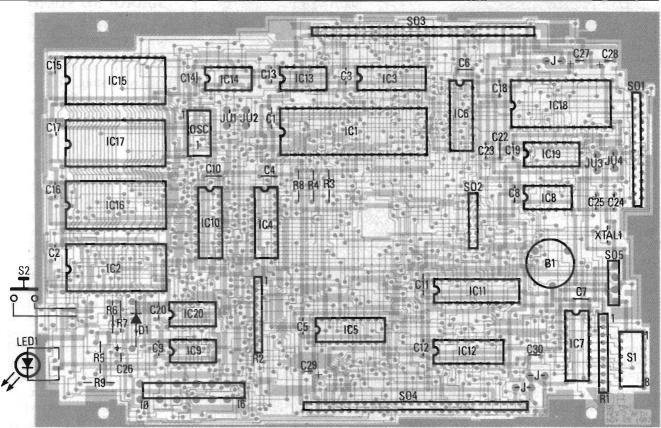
ALL OF THE COMPONENTS mount on one double-sided board. The patterns for the board can be found in PC Service.
